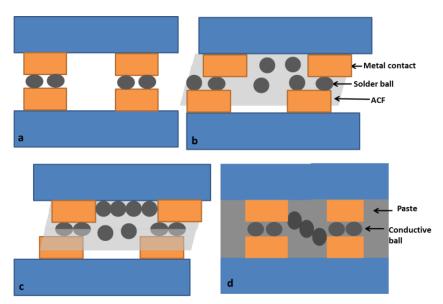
a) ACF with solder ball embedded. b) Misaligned bumps creating high resistance c ) Short ciruit by solder ball in ACF membrane . d) Short ciruit by solder ball in the paste.
